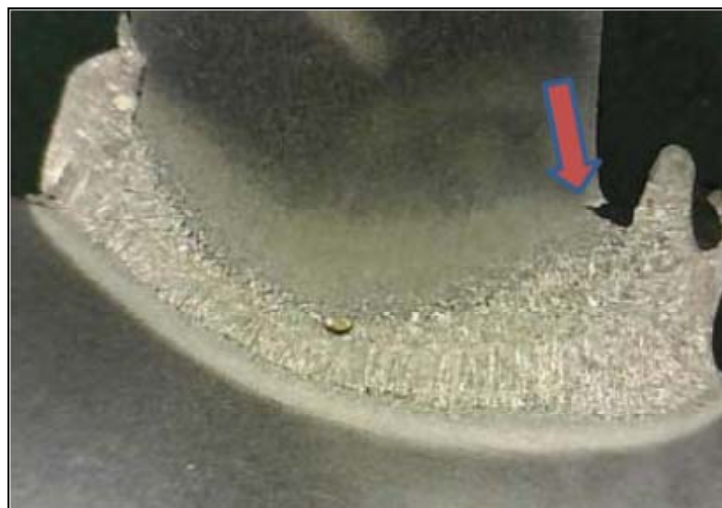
Photo. Cross section of adequate shear stud weld.
